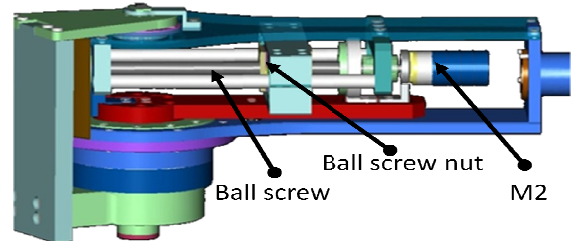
Side view of AwAS showing the linear drive used for the stiffness adjustment
